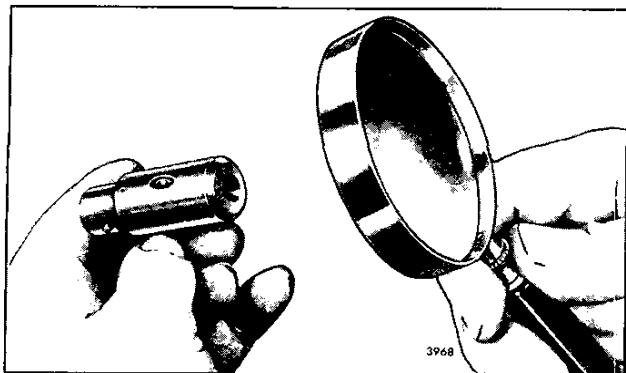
Examining Sealing Surface with a Magnifying Glass
